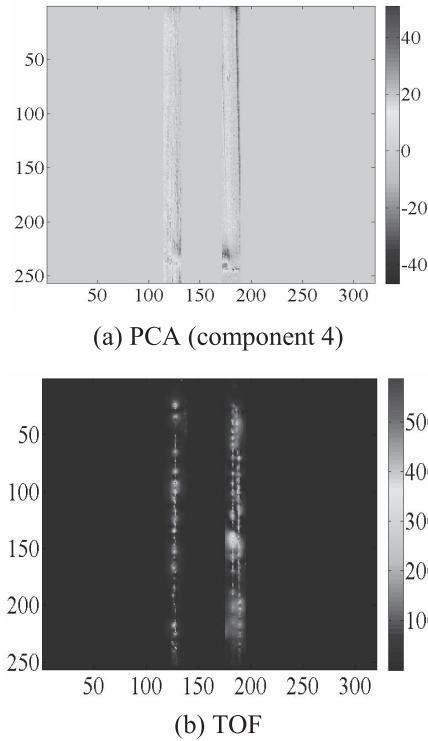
Two-dimensional pseudo colour images at stage 5: (a) using PCA method and (b) using TOF method. (Note: the fatigue non-contact tooth flank is on the left, and fatigue contact tooth flank is on the right).
